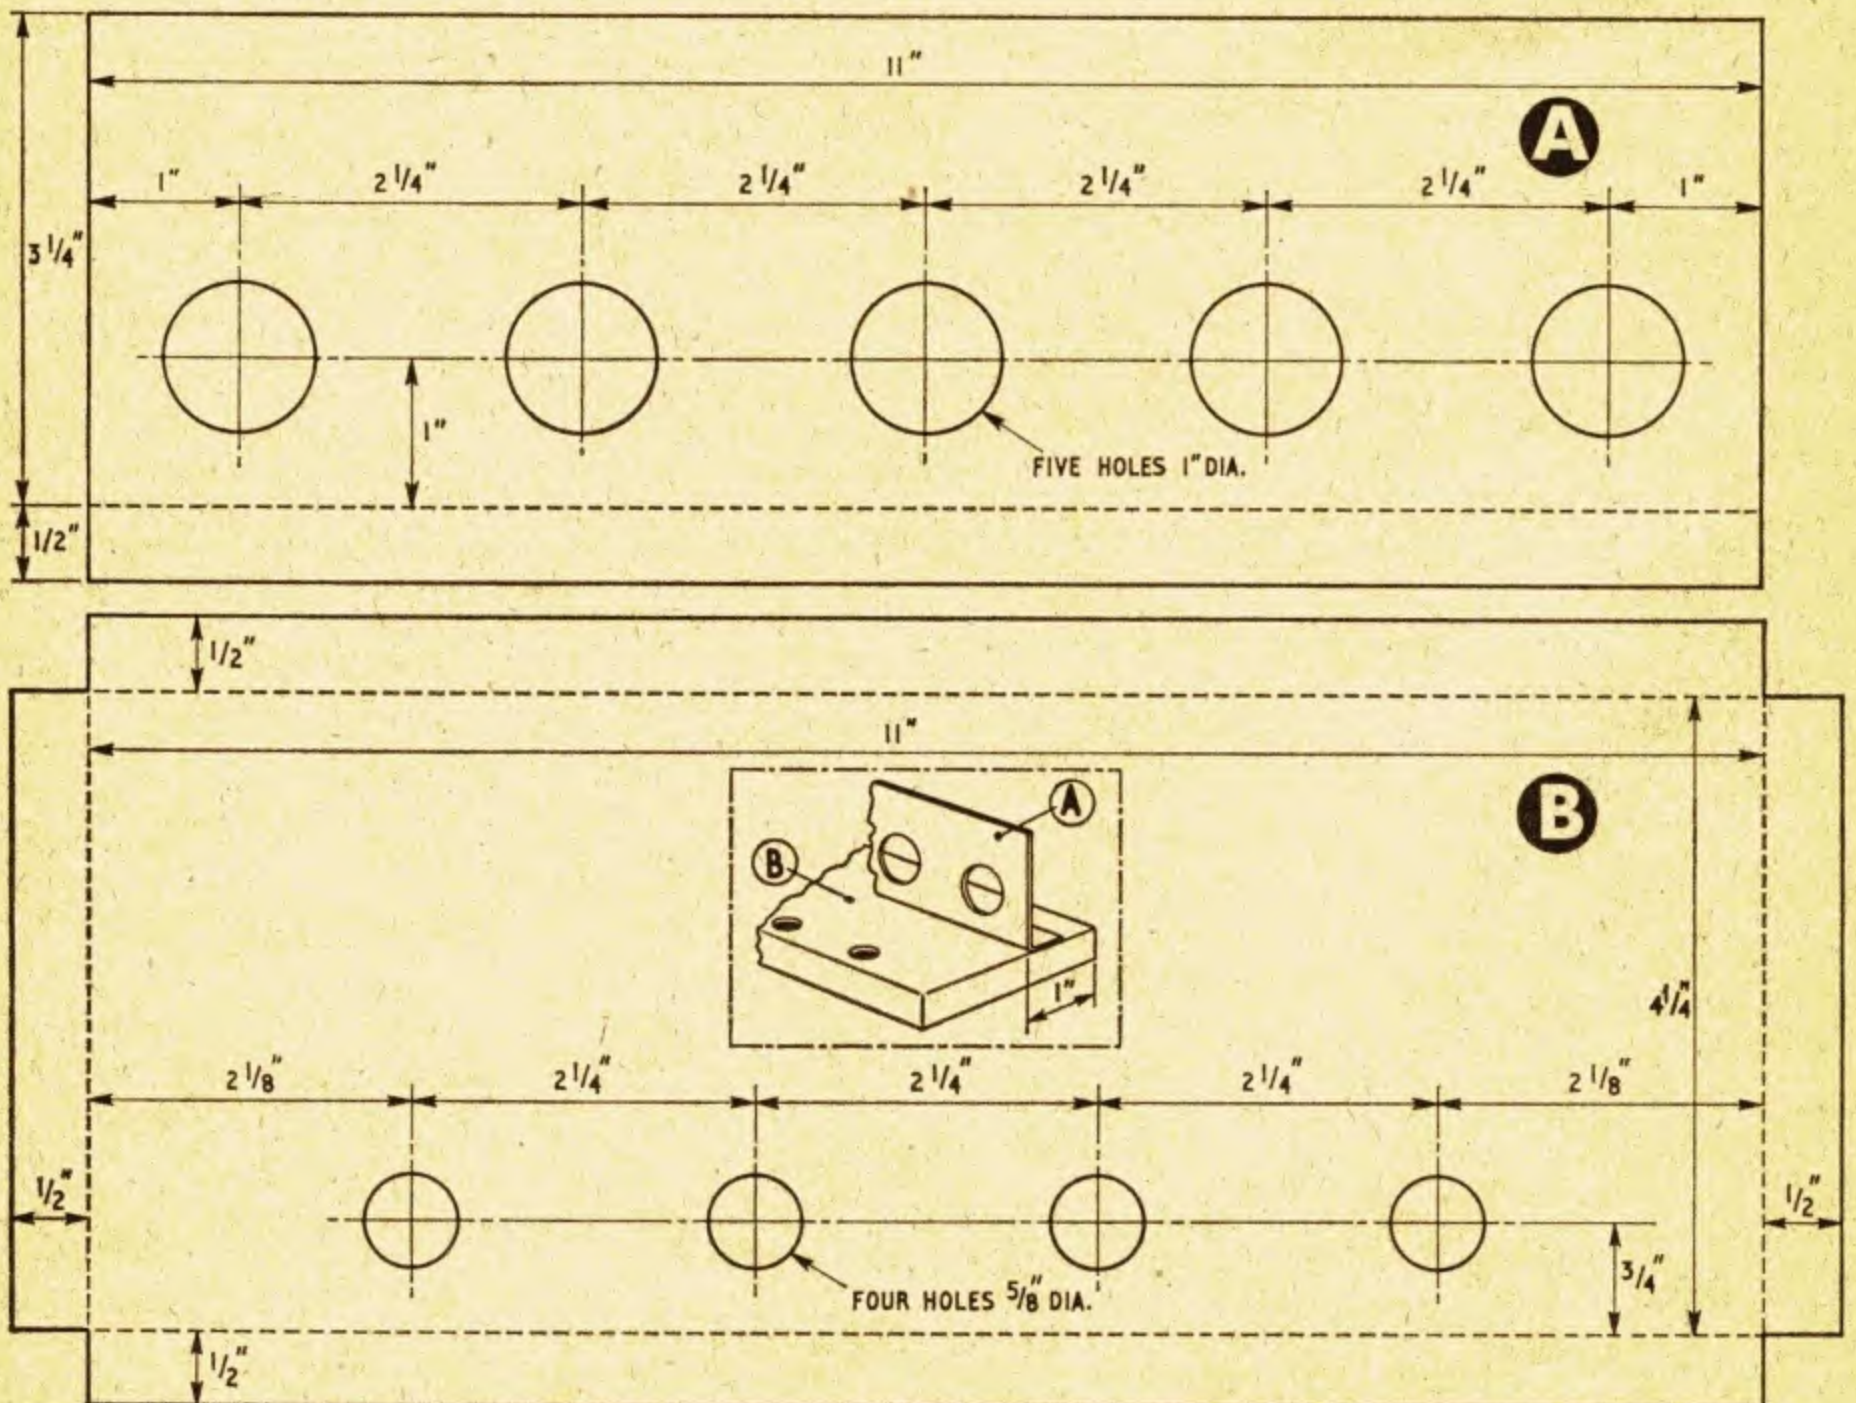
Display unit chassis drilling details. The position of the Dekatron valveholder securing screws on panel "A" is indicated in Fig. 17
